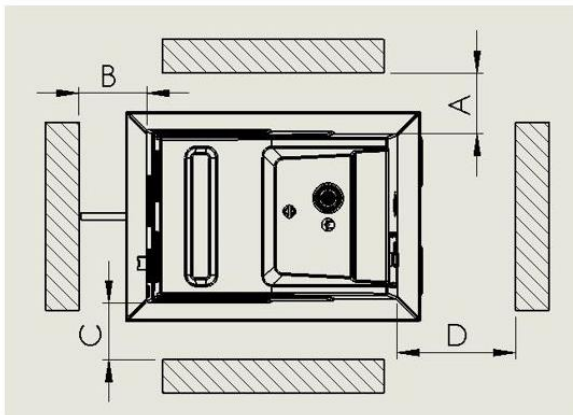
MS120 pump with Noise Abatement System positioning and minimum distances from the wall
